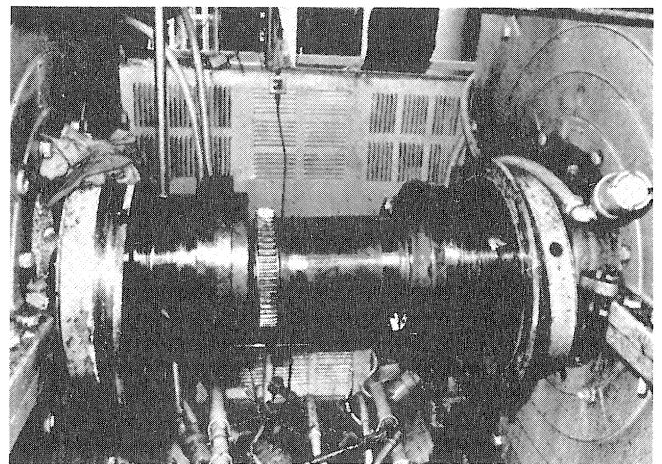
Condition of Coupling Between the Two Motors After Removal of Guard.
